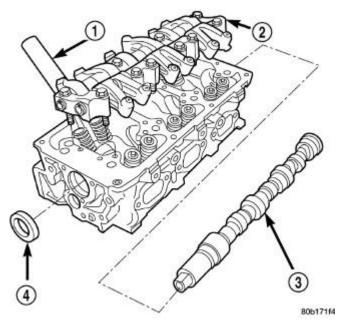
Cylinder Head, Camshaft, and Rocker Arms Courtesy of CHRYSLER LLC
